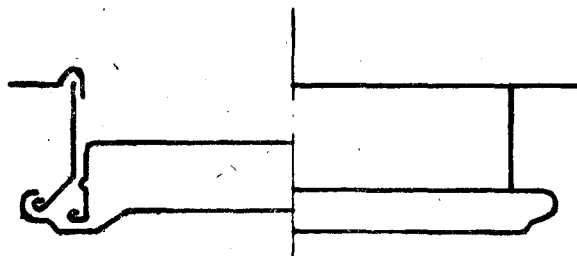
Seamless Lever Neck, Plug and Capsule.
